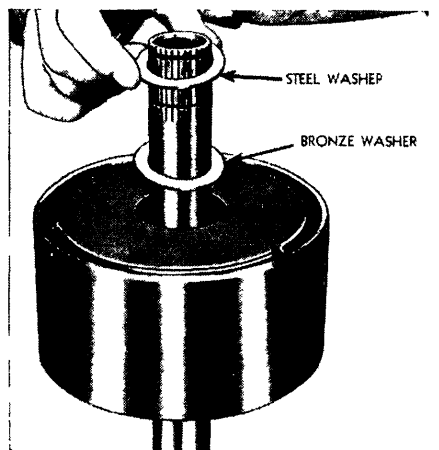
Install bronze then steel washer over carrier. Locating lug on steel washer must fit over flat portion of planet carrier. Install snap ring over carrier into groove above steel washer
